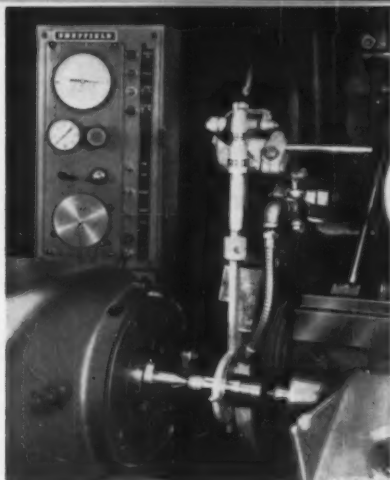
Caliper-type gage commonly used with "in-process" grinding machine controls. The varying back pressure of the jet at the air gage head produces electrical signals. Wear life of the gaging tool in a pneumatic system is generally greater than other systems employing only contact-type gages, owing to the inherent clearance of the pneumatic gaging tool and the part being inspected. By reversal of this caliper-type contacting member, a similar arrangement is used to control the grinding of inside diameters.
